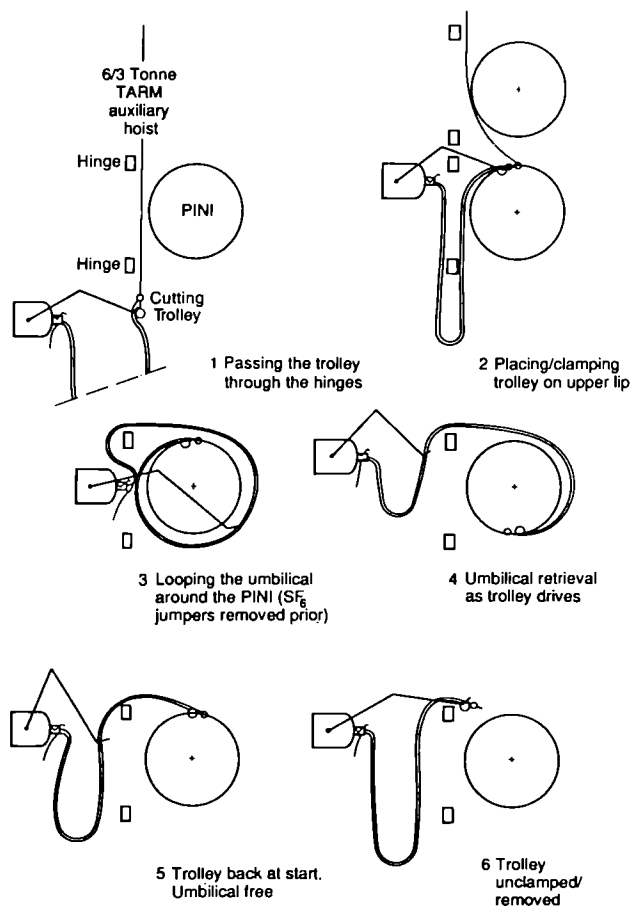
Trolley presentation and operation sequence for PINI lip seal flange cutting or welding
